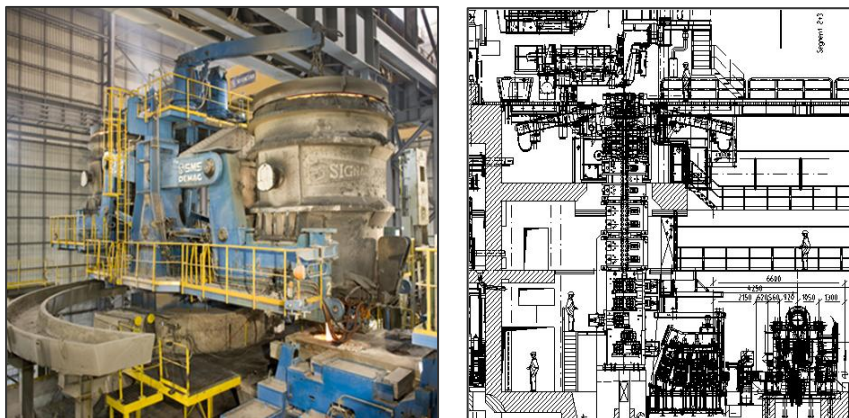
View on casting deck and cross section of CSP[®] thin slab caster.
